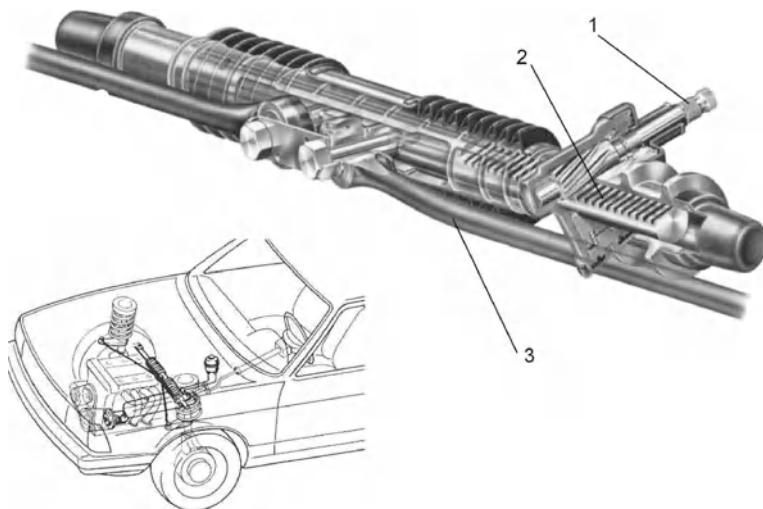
Rack and pinion steering box with central spheric heads. 1 Pinion; 2 rack 3 steering rods (from Genta and Morello 2009)
